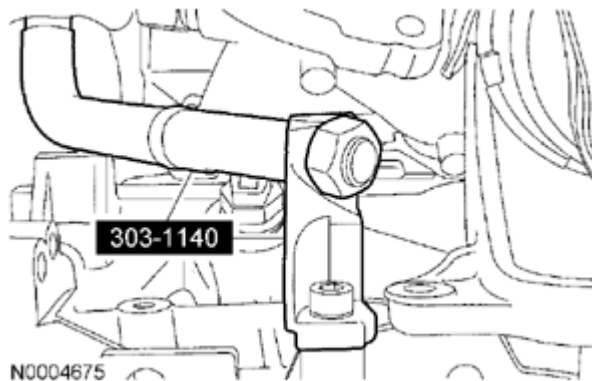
Locating Upper Half Of Engine Lifting Bracket Set
